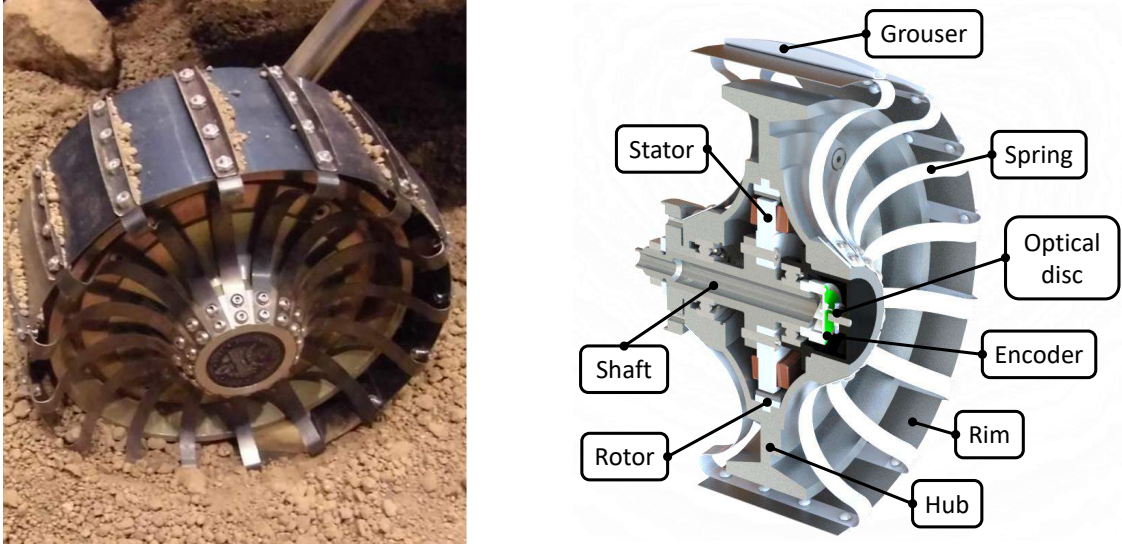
Left: The tested flexible wheel made of spring steel. Right: CAD rendering of the cross-section of the AMALIA wheel. The hub contains a brushless DC motor with external rotor. A 10 mm hollow shaft allows the motor electrical cables to enter the inner part of the wheel.
